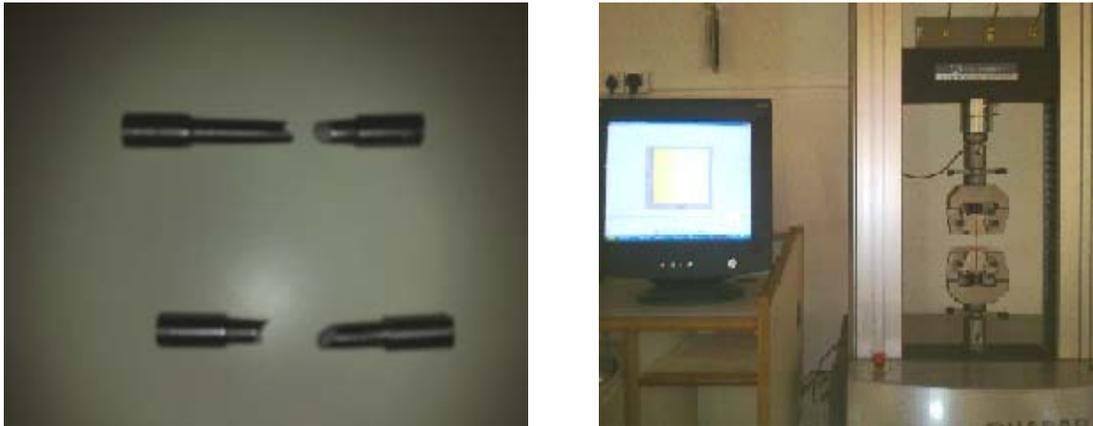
a) The specimens after fracture, b) the instron tensile machine
